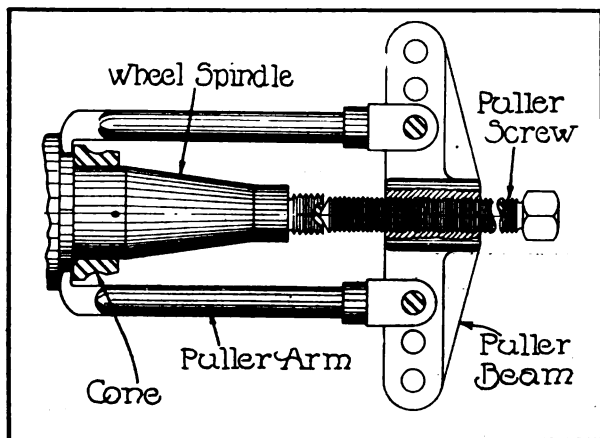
Modified Form of Wheel Puller Having Two Arms and Cross Beam for Displacing a Bearing Cone.
